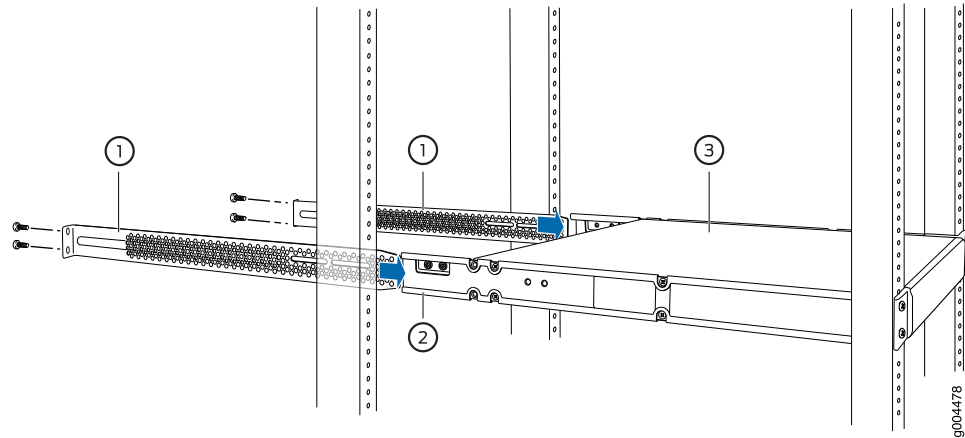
Slide Mounting Rail onto the QFX5100-96S Rear Mounting Blade
